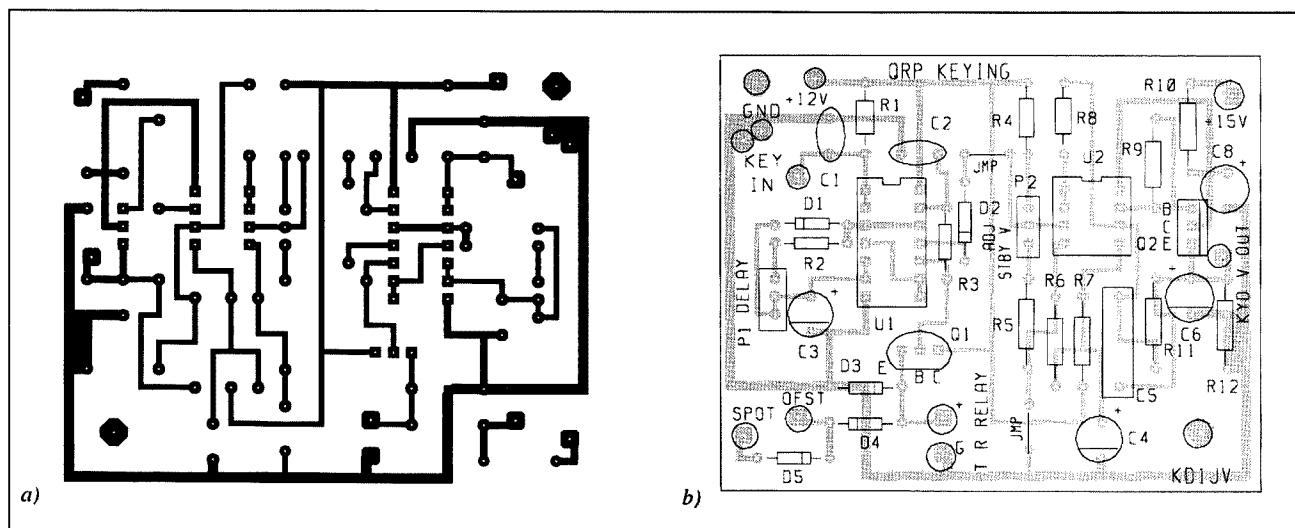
Improved QRP Keying Circuit PC board and parts placement diagram.
